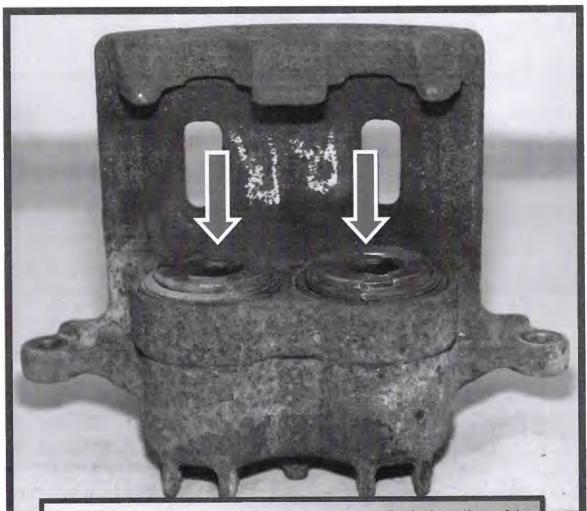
This photograph depicts the right rear disc brake caliper of the involved 2001 Ford Excursion stretch limousine prior to removal from the vehicle. Note the prominent corrosion -- the caliper was that of an older design, with steel composition pistons as opposed to phenolic pistons. The two caliper pistons were seized within their respective bores of the caliper body (Blue Arrows) -- a pre-existing condition.
